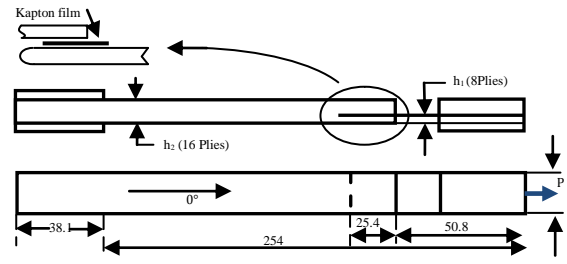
Shape and size of CLS specimen (All dimensions in mm)
